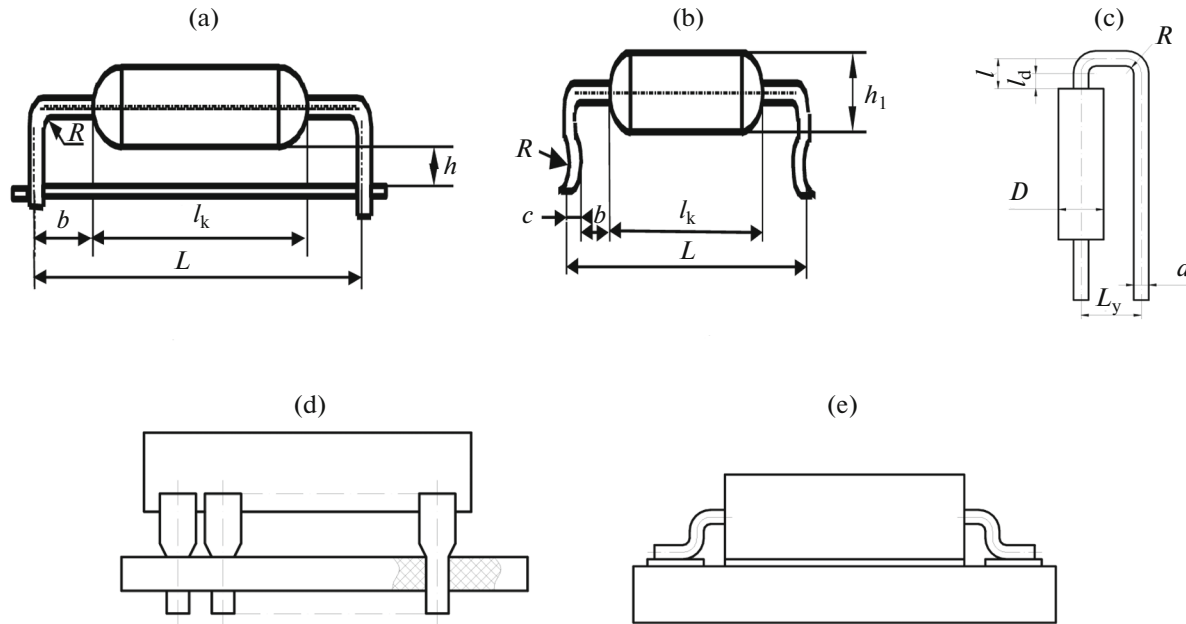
Options of lead forming and component mounting on boards: (a) 010, (b) 140, (c) 220, (d) 330, and (e) 360.
